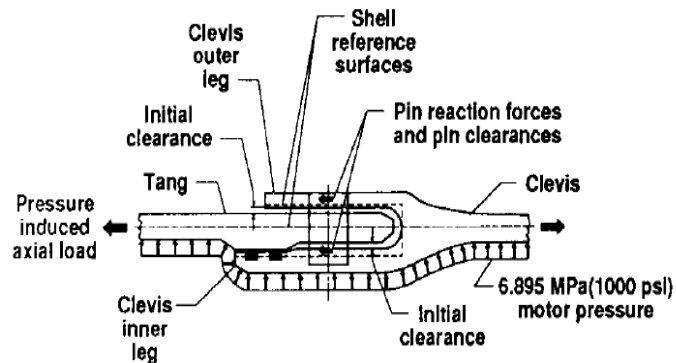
The pressure on inner faces in field-joints without Bosch [6].
